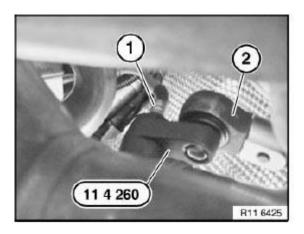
Identifying Lambda Control Sensor Courtesy of BMW OF NORTH AMERICA, INC.
